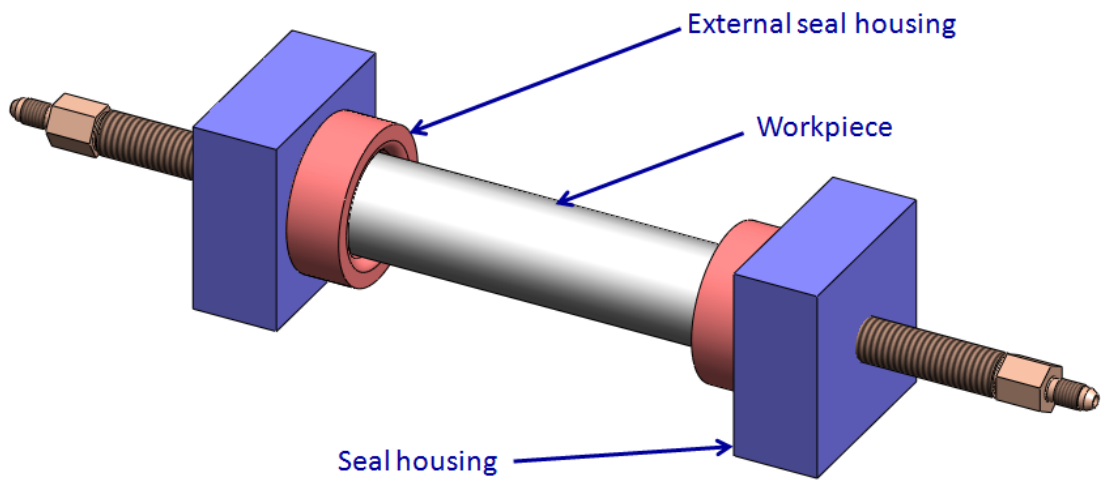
A tubular blank workpiece with the seal assembly on either side.
